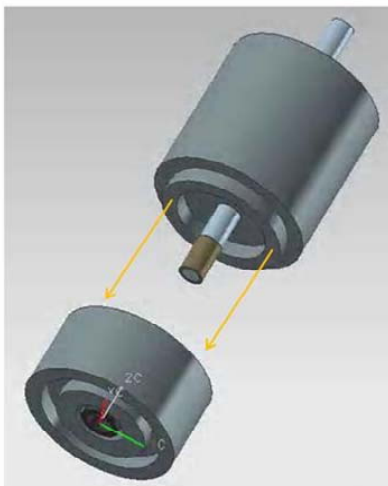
Press-Fit Cradle Top and Bottom Assembly
